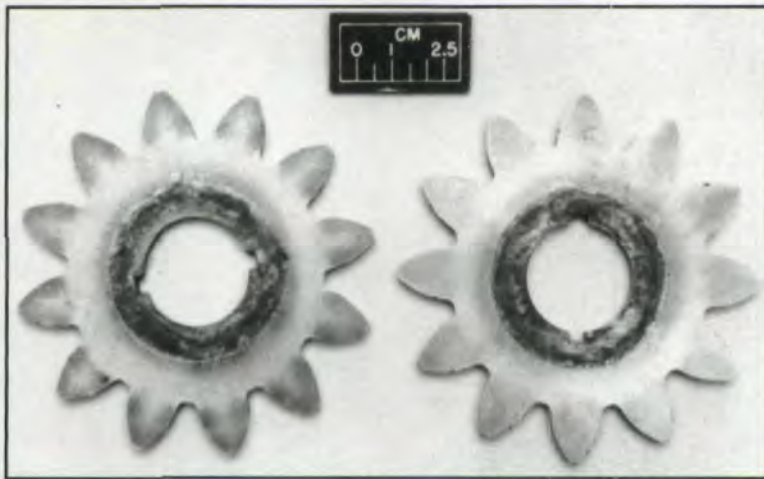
Test gear configurations. (a) Standard involute. (b) Noninvolute.
